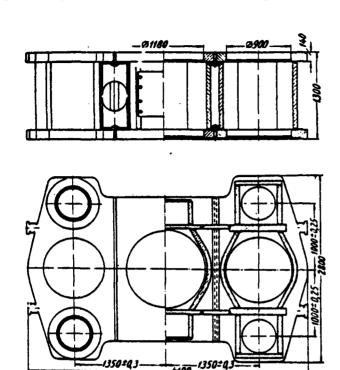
Welded upper cross-beam of stamping machine by effort/force 3000 t (Uralmashzavod).
